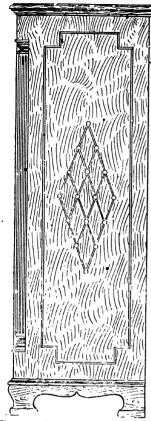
End Elevation of "Tallboy" Chest of Drawers.
